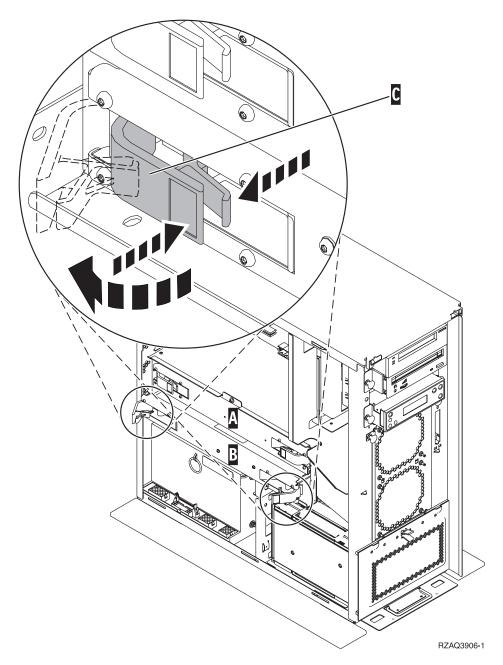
Location of 2884 card assembly in a 270, 800, or 810 system unit
